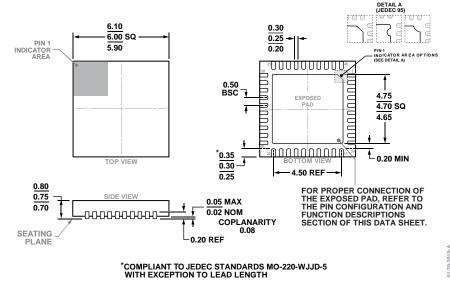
40-Lead Lead Frame Chip Scale Package [LFCSP] 6 mm × 6 mm Body and 0.75 mm Package Height (CP-40-27) Dimensions shown in millimeters
